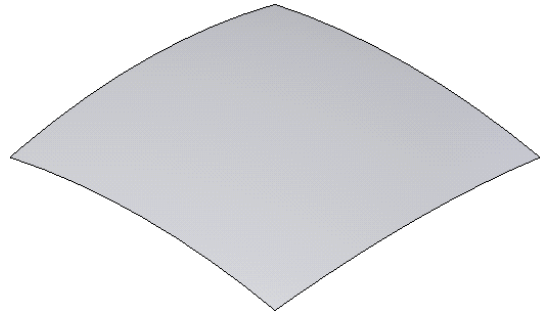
Resultant untrimmed surface with the All edges radio button selected
